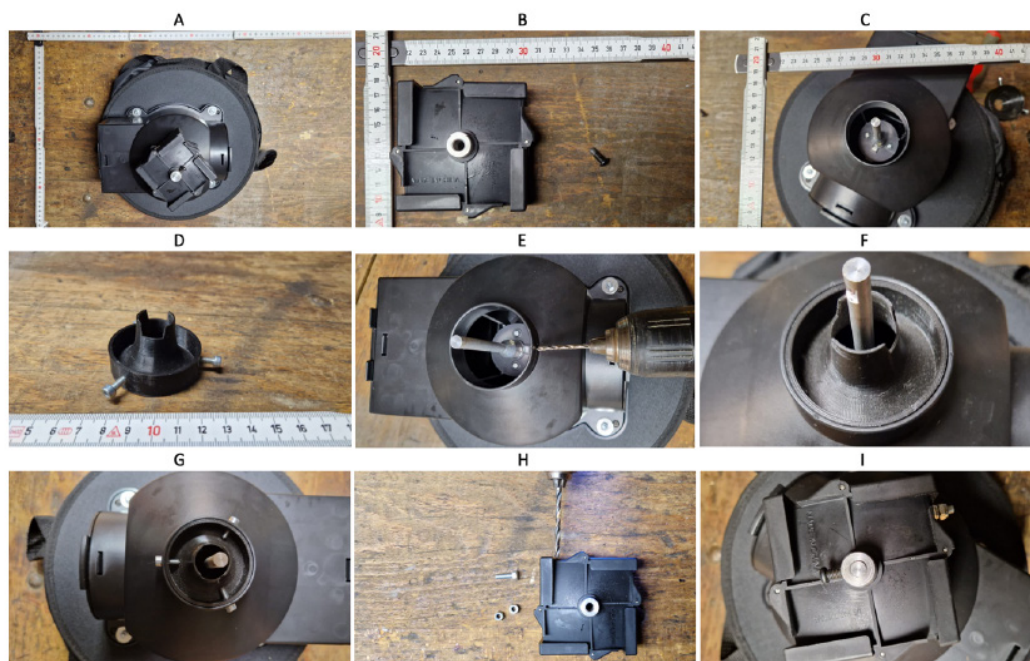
A-I; A Food dispenser, model Feeder Compact X42 (Dörr GmbH, Neu-Ulm, Germany), straight out of the package; B Dismounted rotating chamber with the loosened horizontally-oriented screw; C Remaining main part of the machine without rotating chamber, in the middle the axis of rotation; D 3D printed insert with screws in position; E Pre-drilling the three holes in the shell of the machine shaft; F 3D piece placed into machine shaft; G Inserted 3D piece fixed by screws; H Asymmetric attaching of a screw to cause an imbalance on the rotating chamber; I Reinstalled rotating chamber after inserting the 3D printed piece and attaching the imbalance screw.
